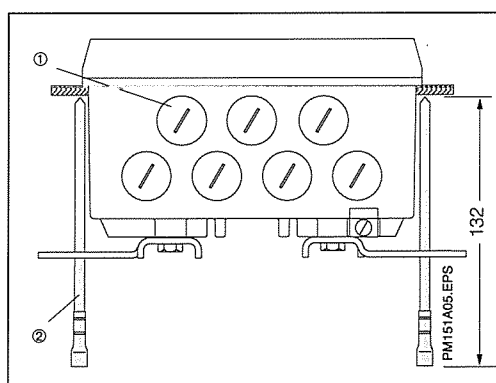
Bottom of field housing with mounting dimensions and tensioning screws for panel mounting installed
